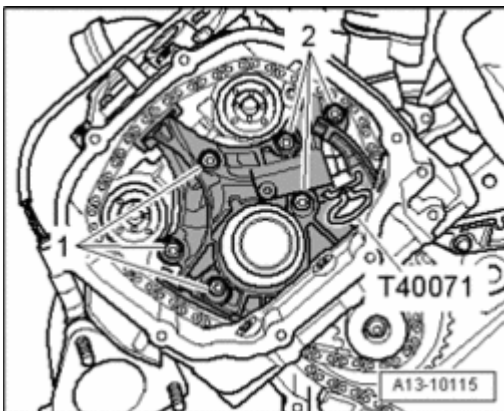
Identifying Bolts For Left Chain Tensioner And Left Camshaft Timing Chain
